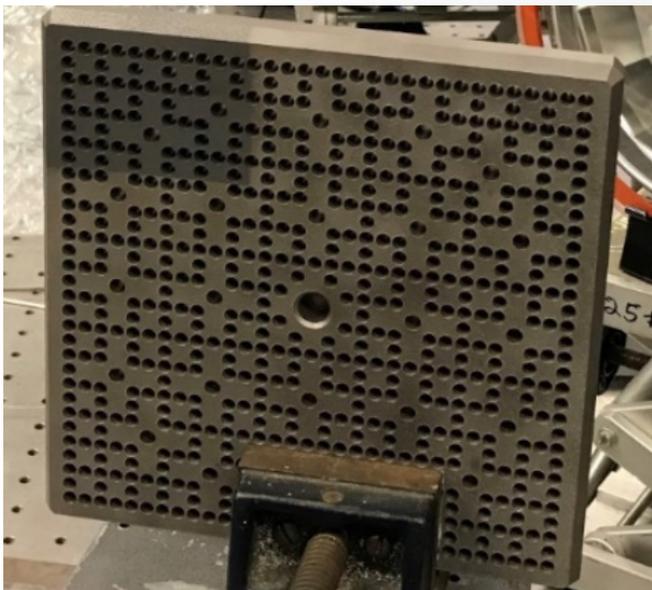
Photograph of 3-D printed IN718 nozzle plate.
